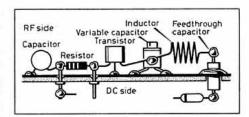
Pin-and-wire construction on single-sided board, copper side uppermost
